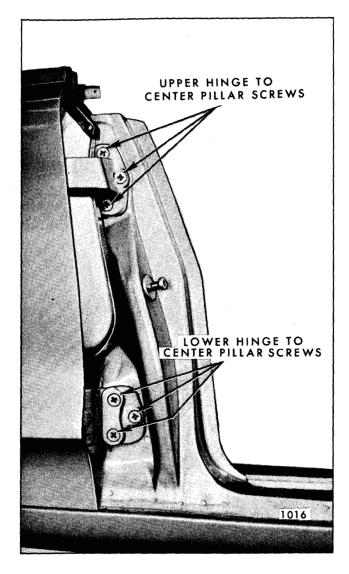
Rear Door Hinge Attachment - "B" Style Shown - Others Similar
